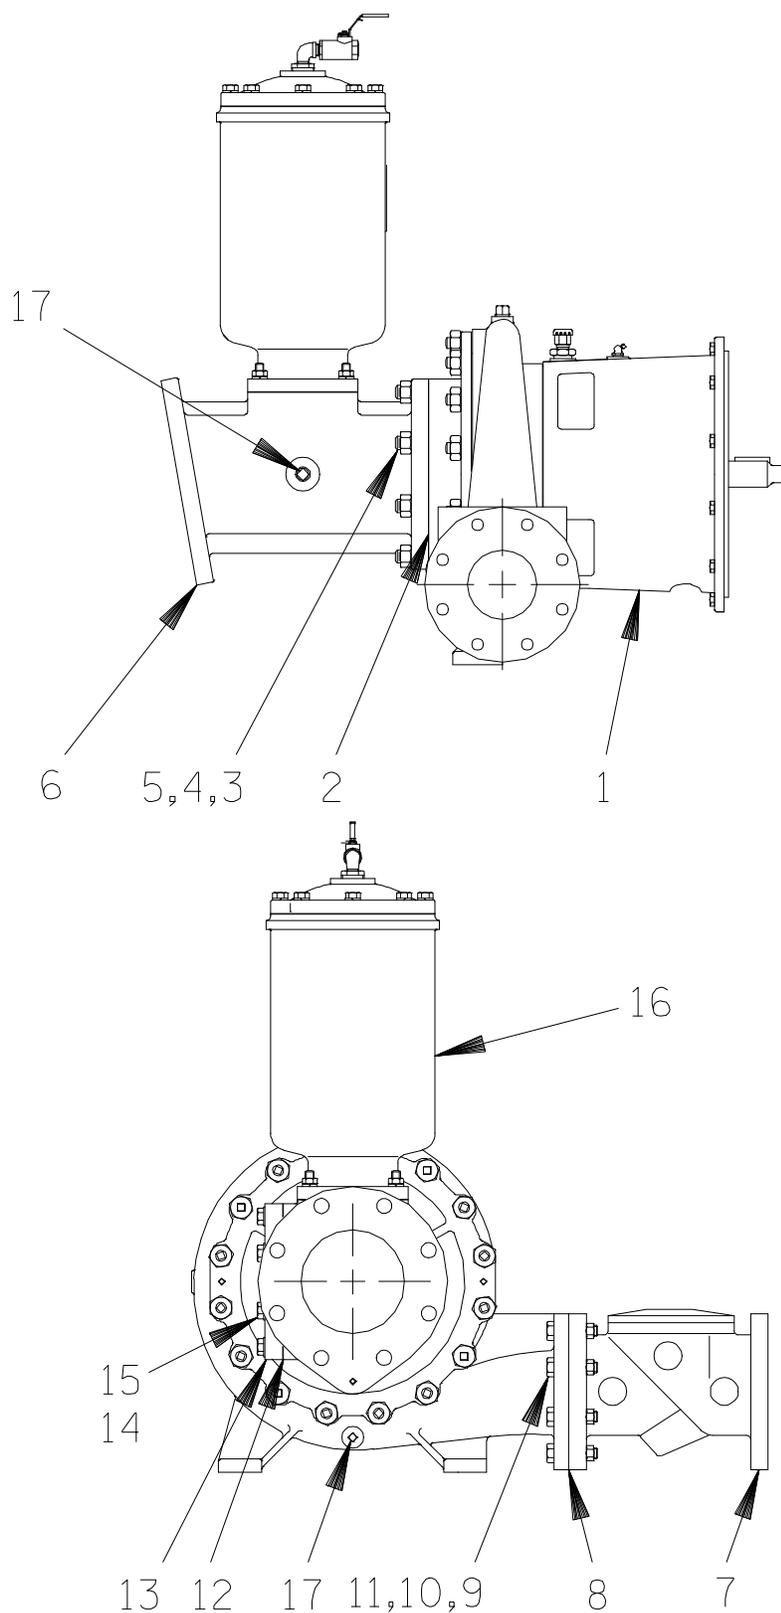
PA4B60-(SAE 4/10) Pump End Assembly
